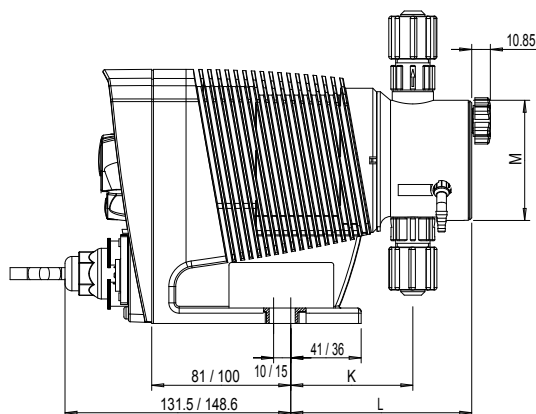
Dimension drawing Beta b BT4b/BT5b, material version PP - dimensions in mm
